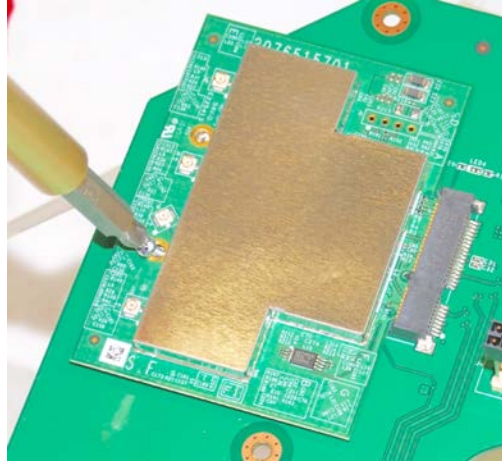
Secure the 802.11bgn WiFi Radio Module in to the PCIe card
